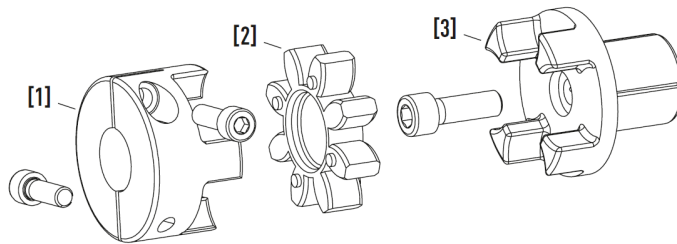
Coupling assembly variant 2: Clamping hub with two clamping bolts
